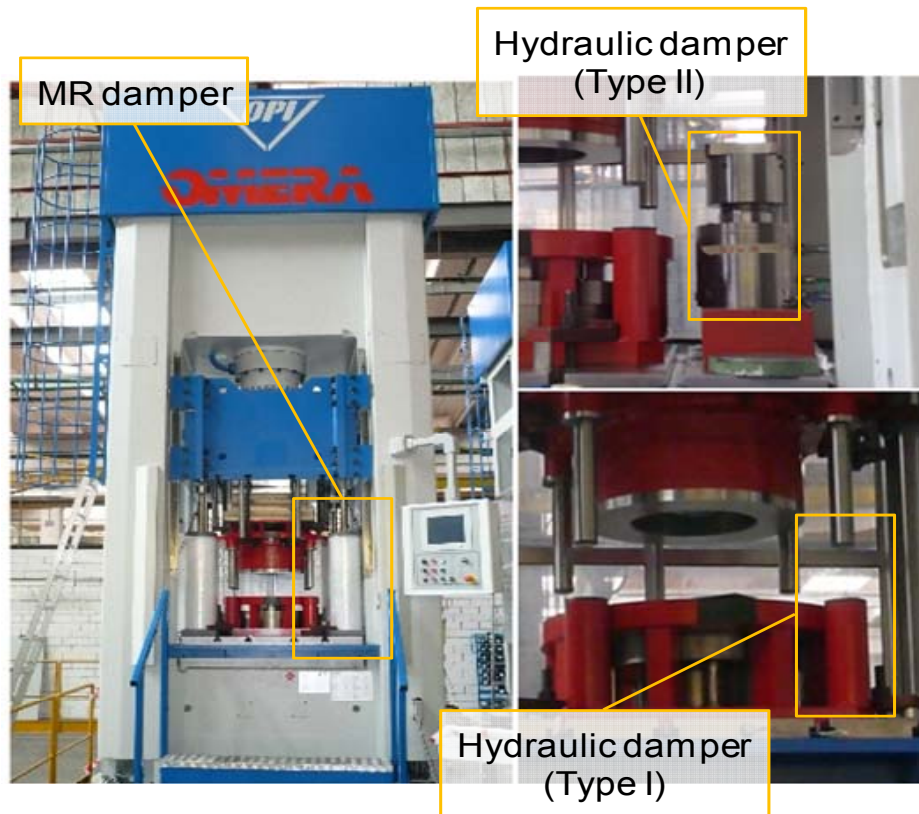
Mr damper in the press on the left; on the right, details of Type I hydraulic dampers (top) and detail of the Type II hydraulic dampers(bottom).
